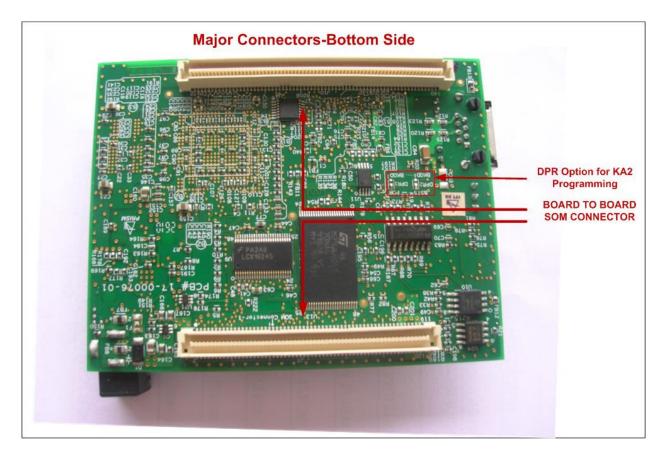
Major connectors on Bottom side of the MPC8306 SOM Card
